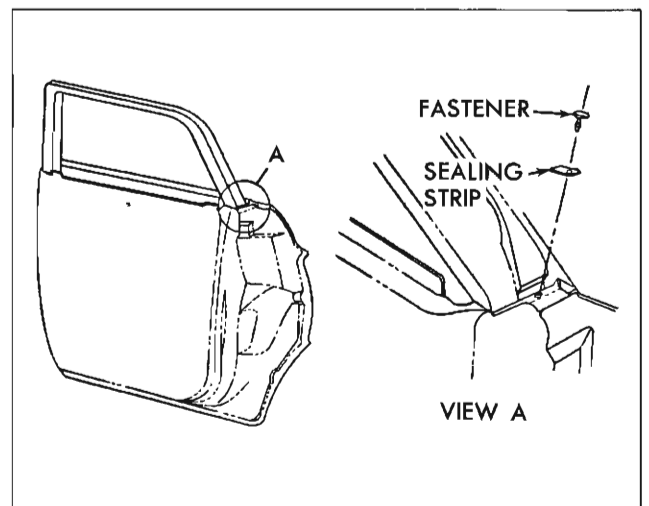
Rear Door Lock Pillar Sealing Strip Fastener
